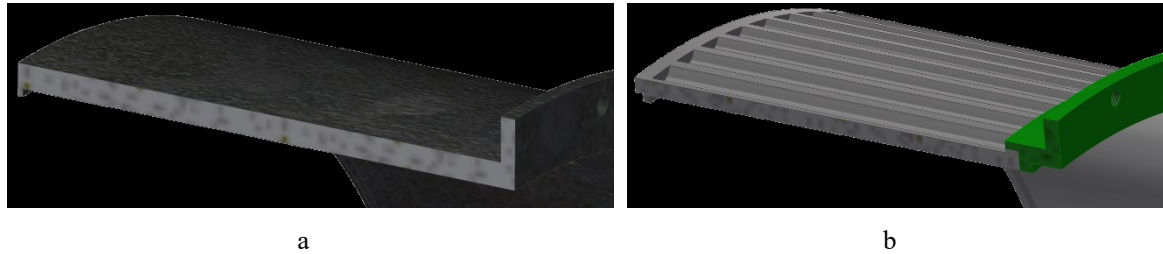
Variants of the rotor back iron: a - As fully cylindrical part, b - With radial shaping
